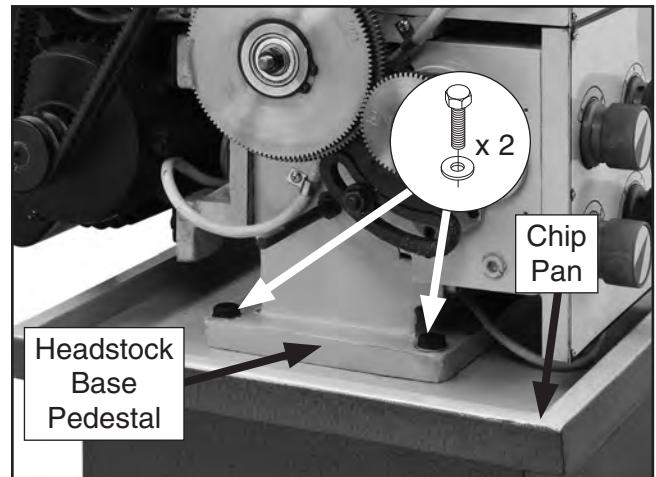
Lathe mounting hex bolts 2 of 6. (Headstock end cover removed for clarity.)
